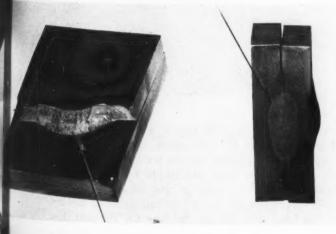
Tin-coated copper braid spot-welded to cadmium plated steel saves solder and produces more flexible braids than was possible with previous methods
